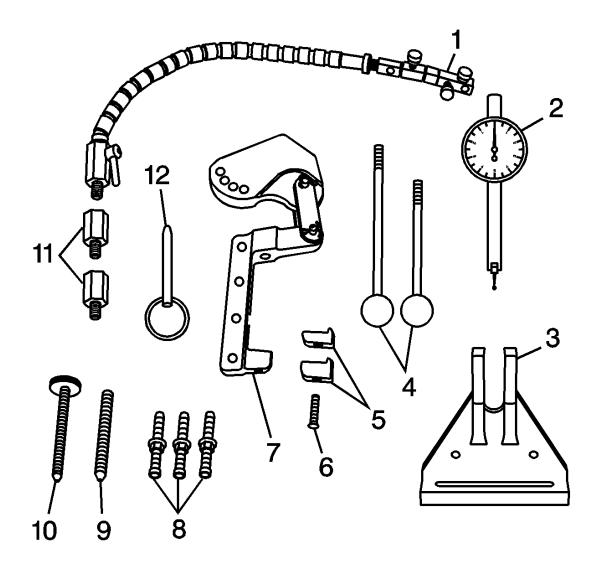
Identifying Rod Bearing Clearance Checking Tool Courtesy of GENERAL MOTORS CORP.
